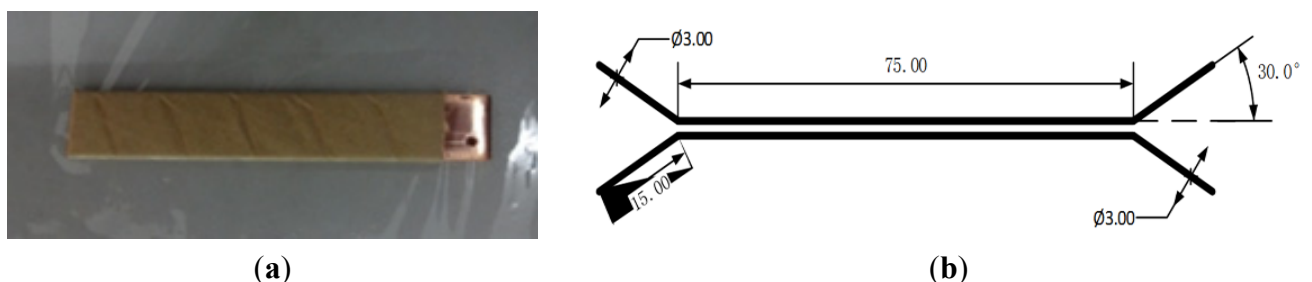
Paper-wrapped copper winding and dimension pig-tail model. (a) winding; (b) dimension of pig-tail model.
